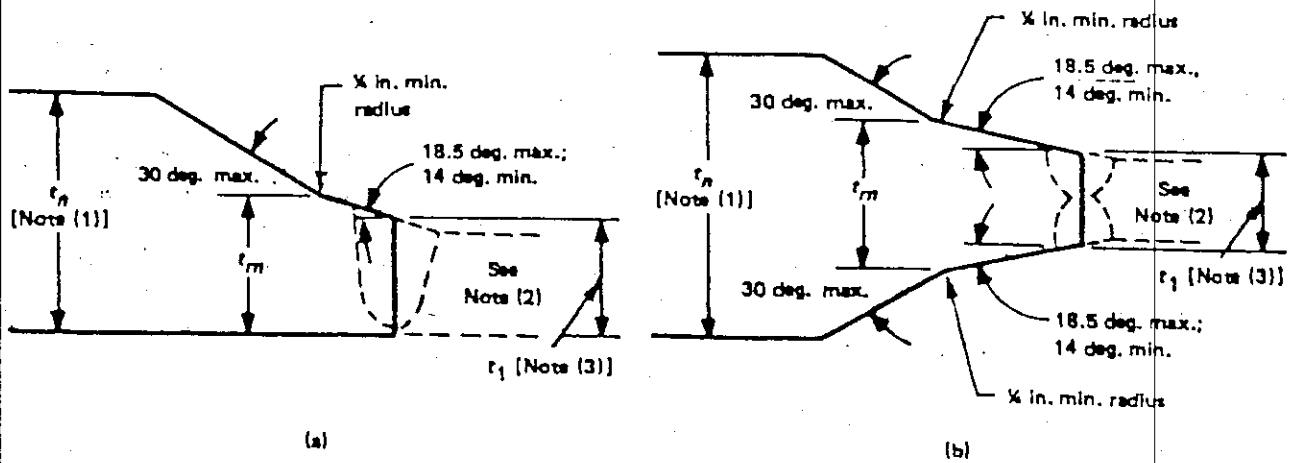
BUTT WELDING OF PLATES OF UNEQUAL THICKNESS
